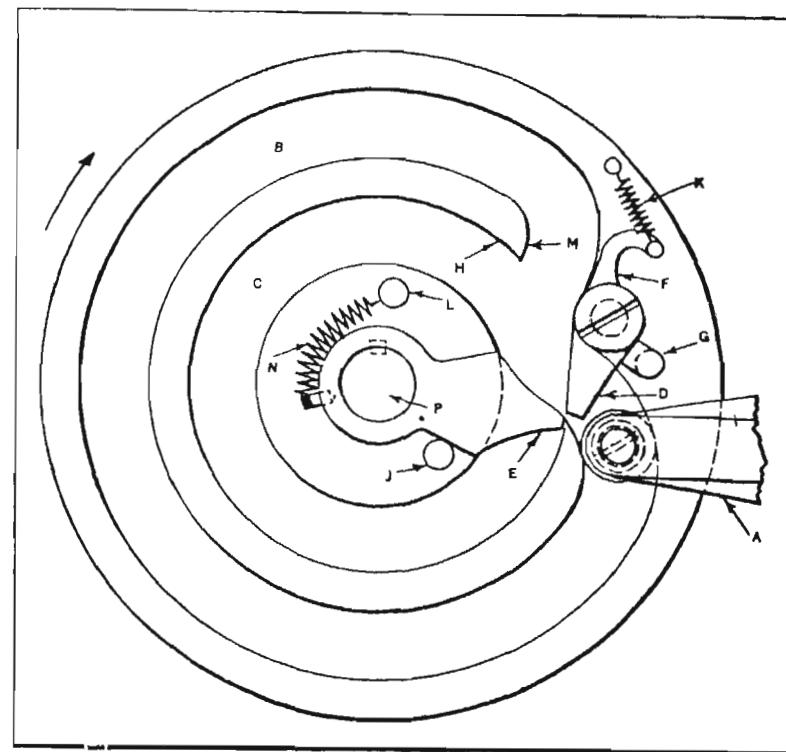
Cam having Two Concentric Grooves which are Engaged Alternately by a Roller on the Driven Slide
